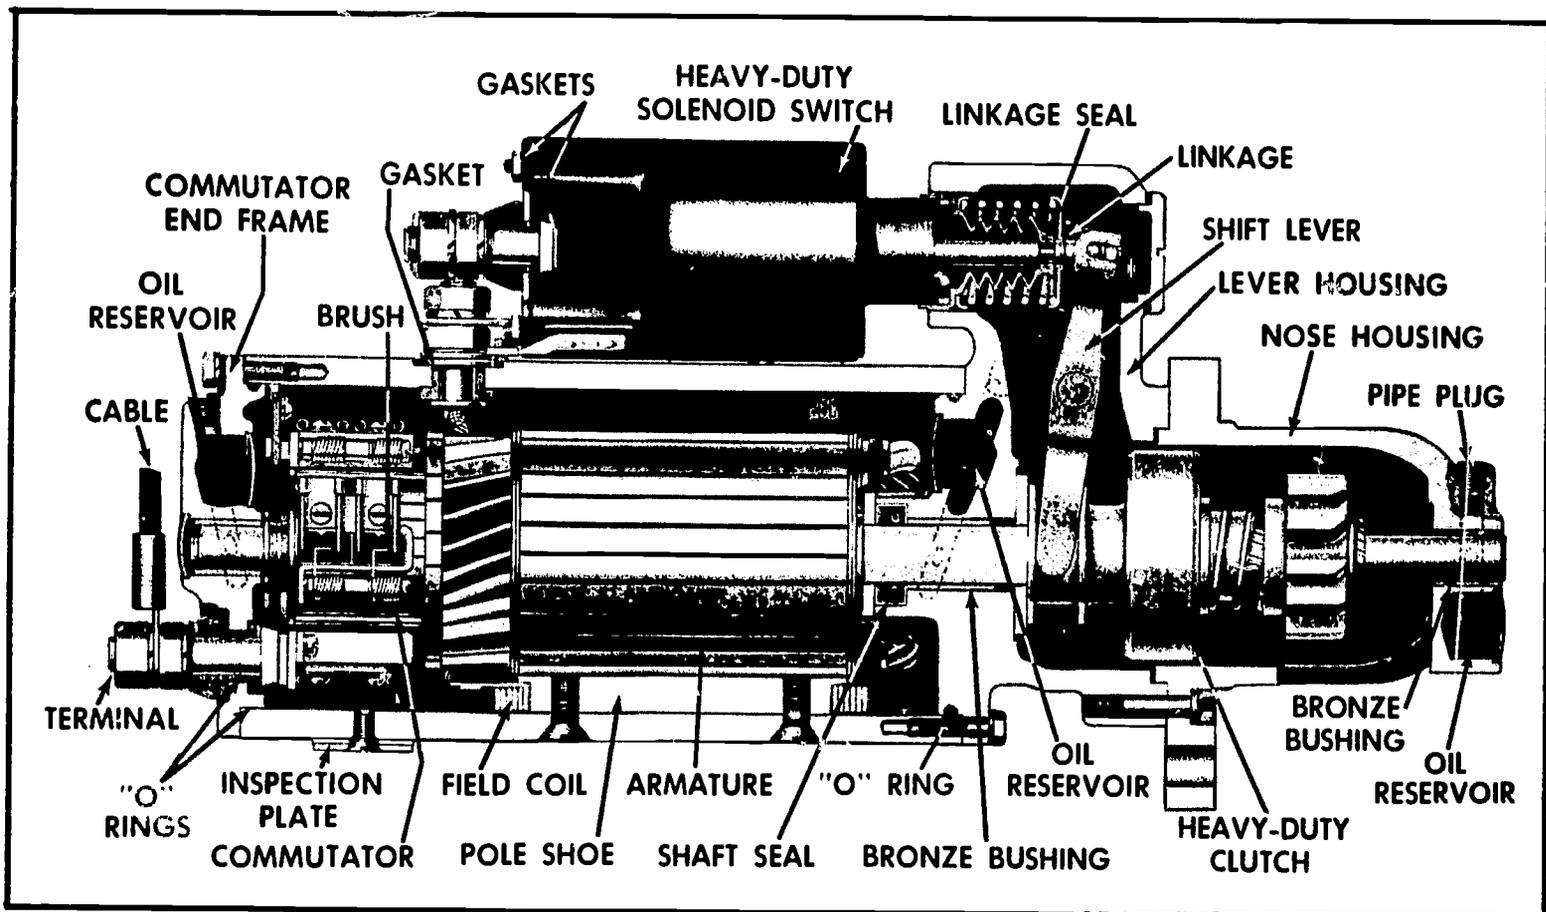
Cutaway view of a heavy duty Sprag Clutch Cranking Motor.
